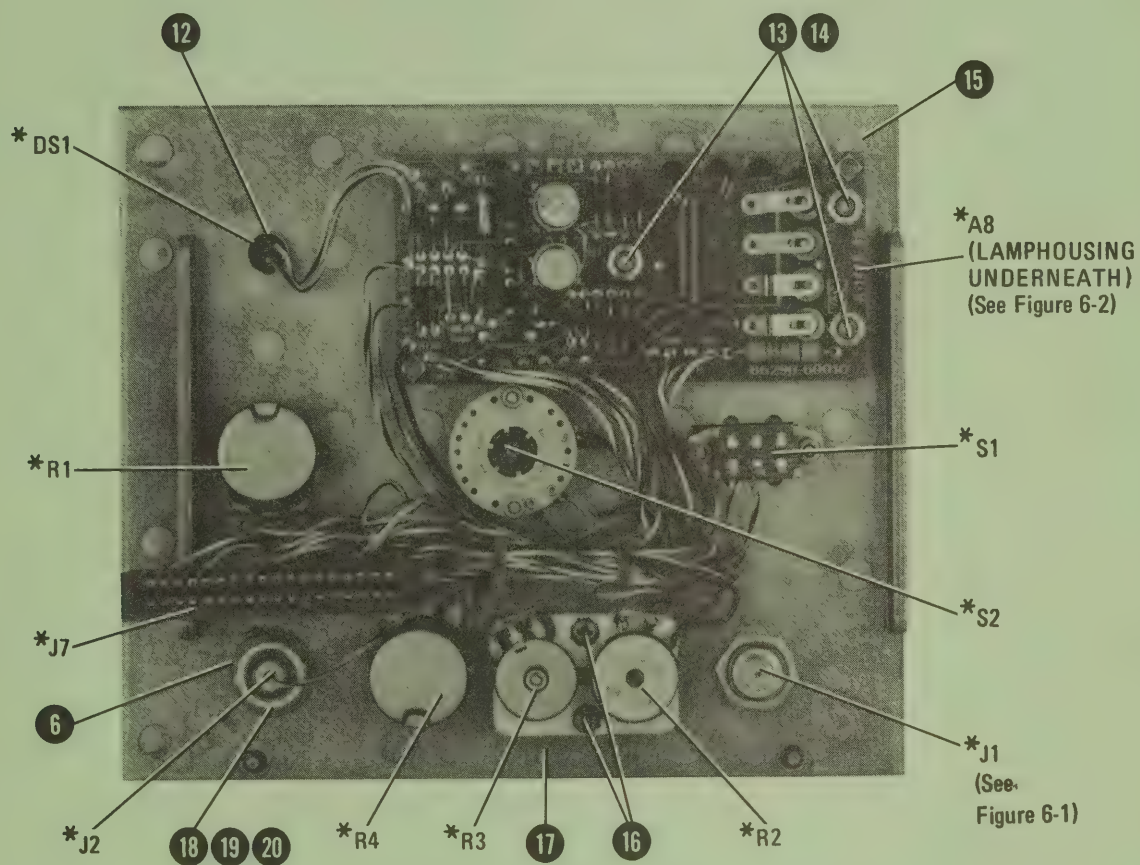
Front Panel Parts Identification (CHANGE F)
